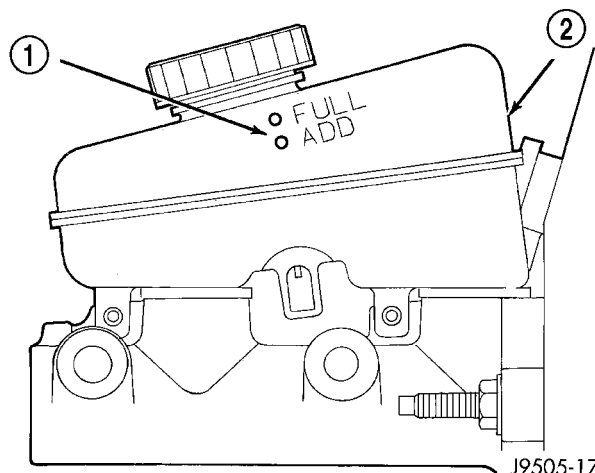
TYPICAL - MASTER CYLINDER FLUID LEVEL
